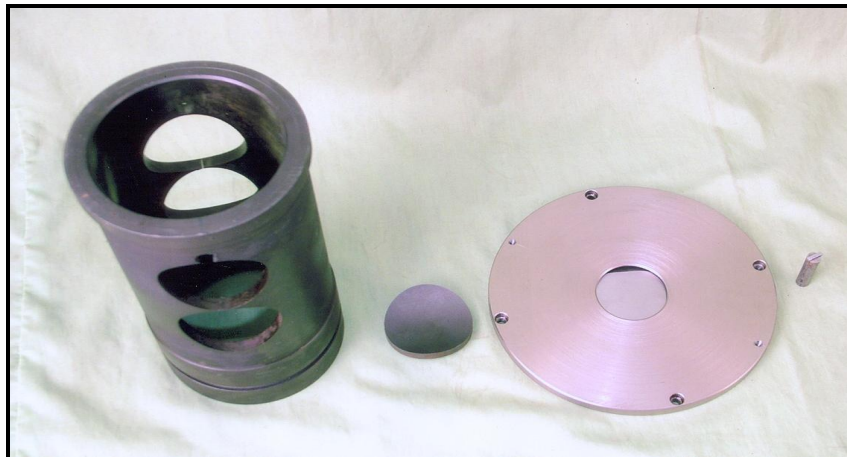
The cylinder, cut disc, disc in disc holder and pin in pin holder
